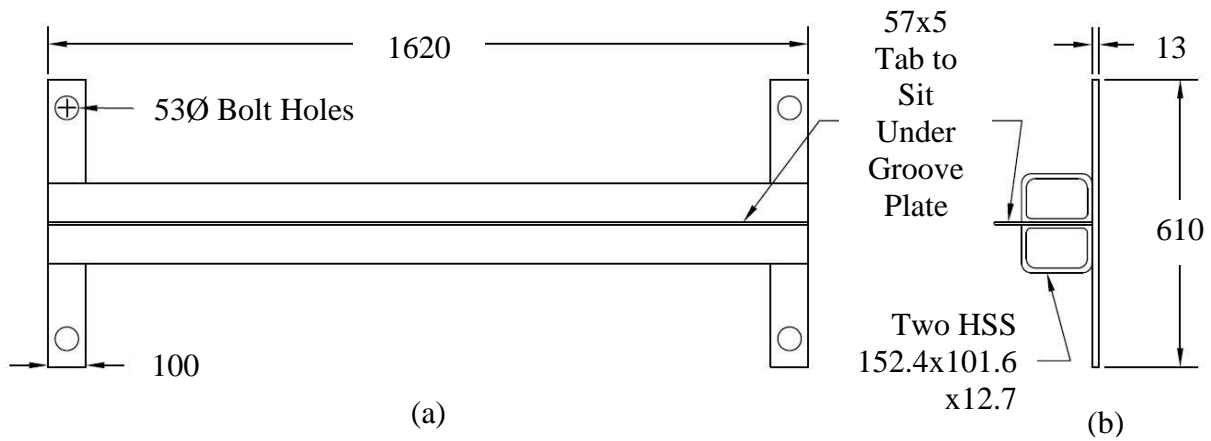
Knife Edge: (a) Top View, and (b) Side View (Dimensions in mm)
